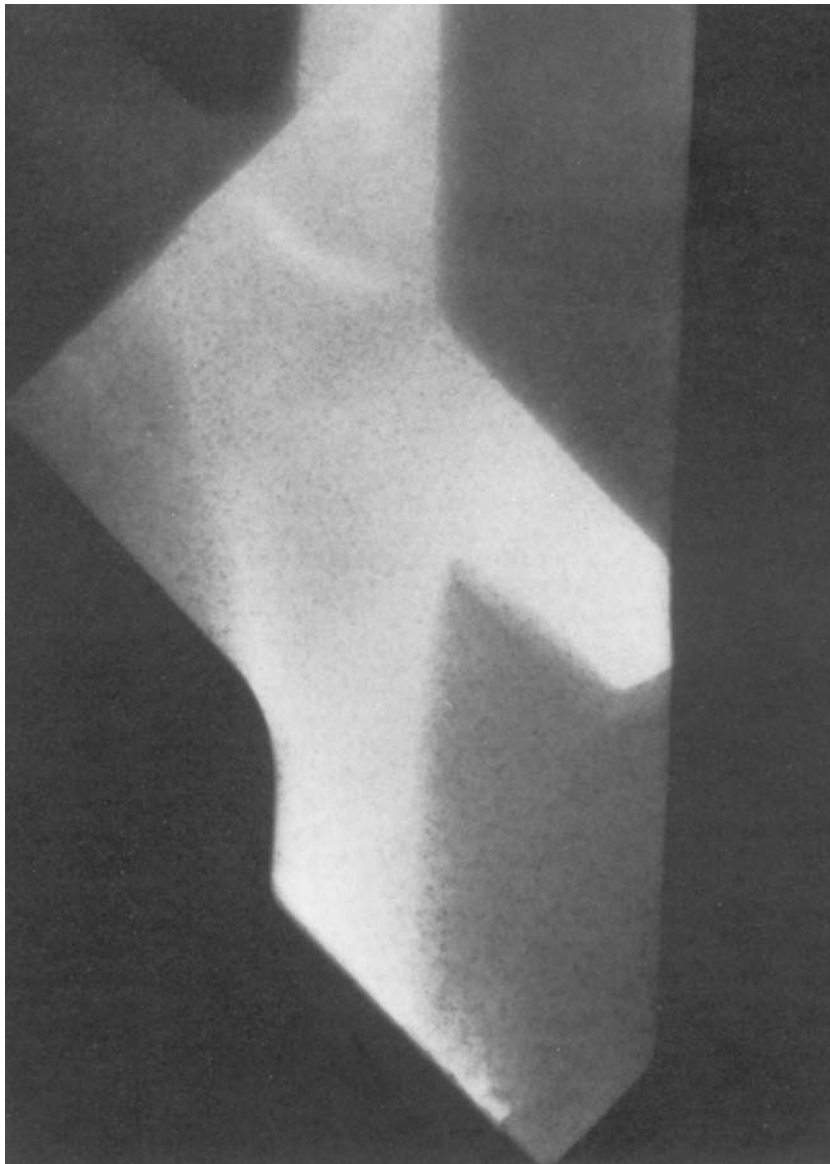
Radiograph of 25mm thick aluminium-copper alloy casting with gas porosity
